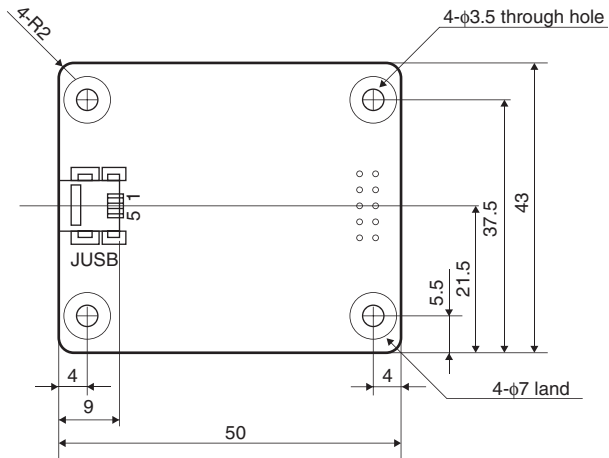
Dimensions of the ICD Board (Front)
